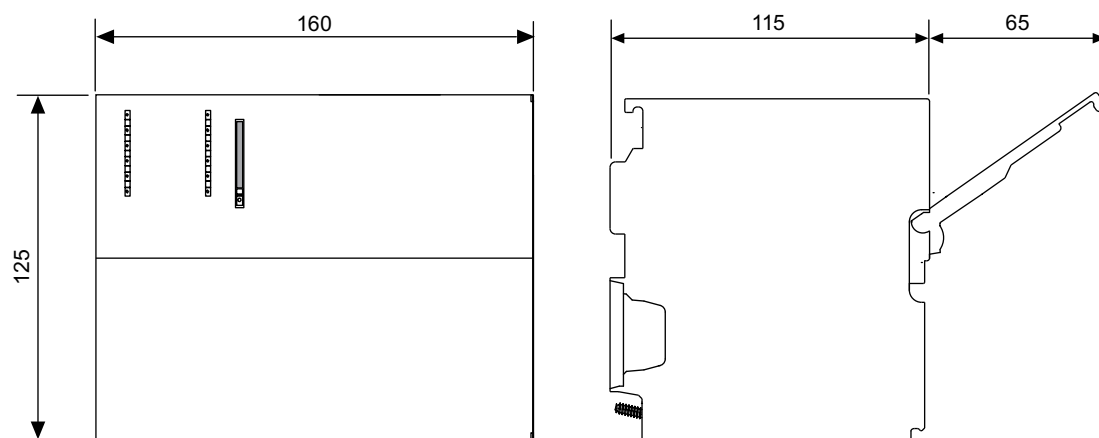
Dimensional drawing EC31 (dimensions in mm)
